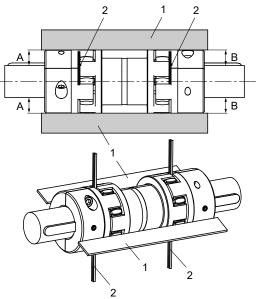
Double Cardan spacer-type coupling, checking the coupling alignment
